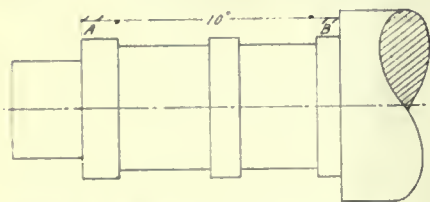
ONE METHOD OF COMBINING FINISH MARKS WITH A DIMENSION LINE.
